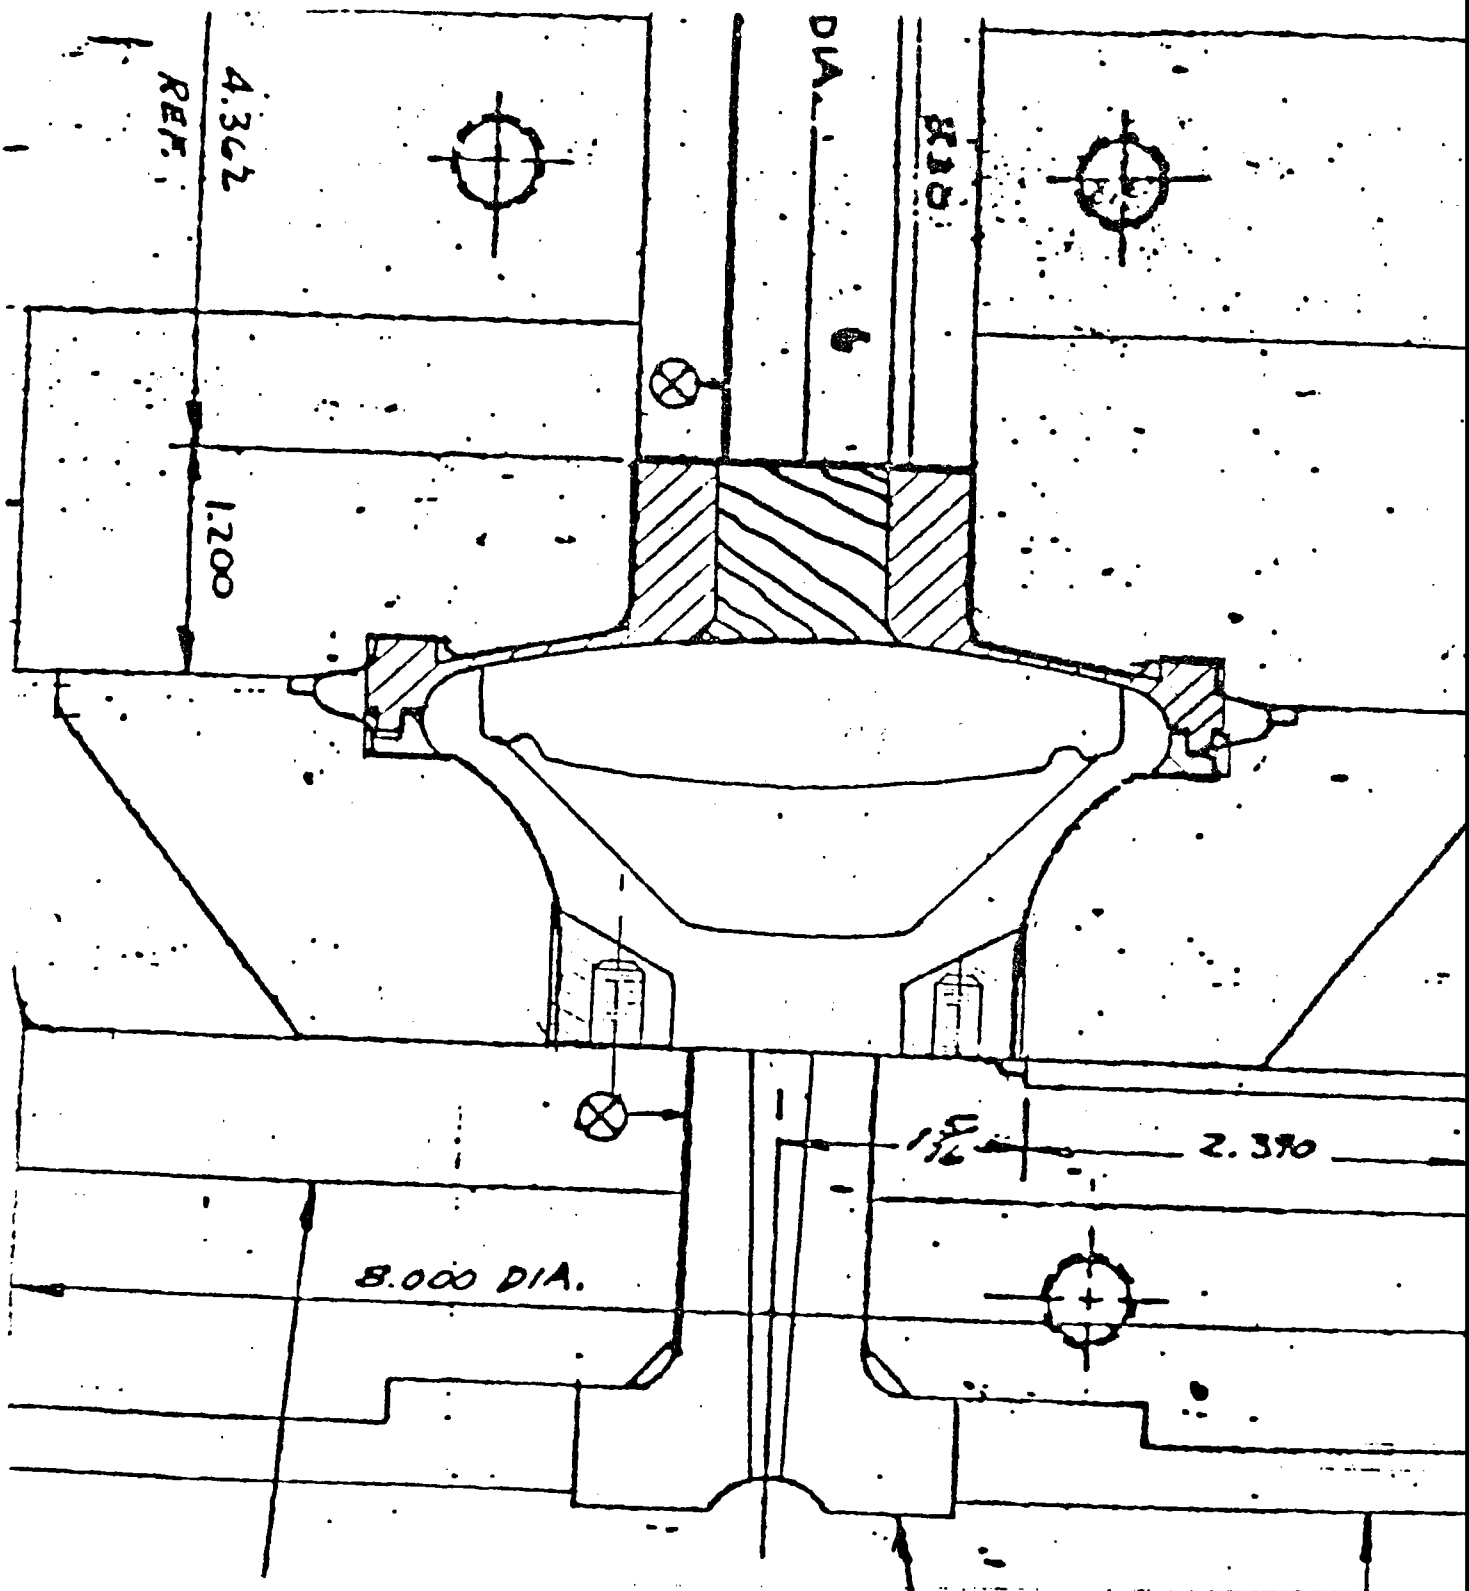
AGT Common Rotor Mold Tool Assembly
